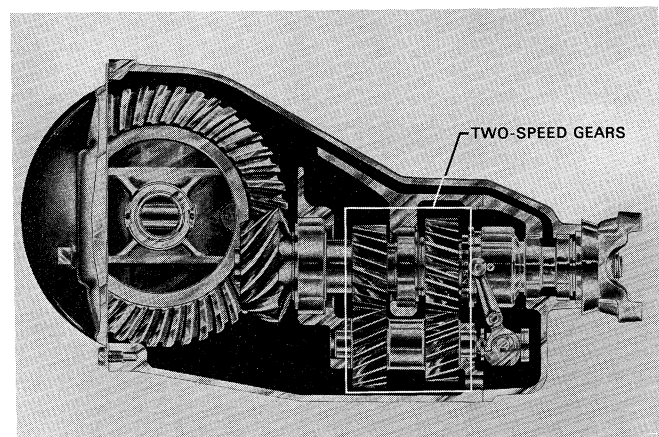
Courtesy Spicer Axle Div., Dana Corp.
